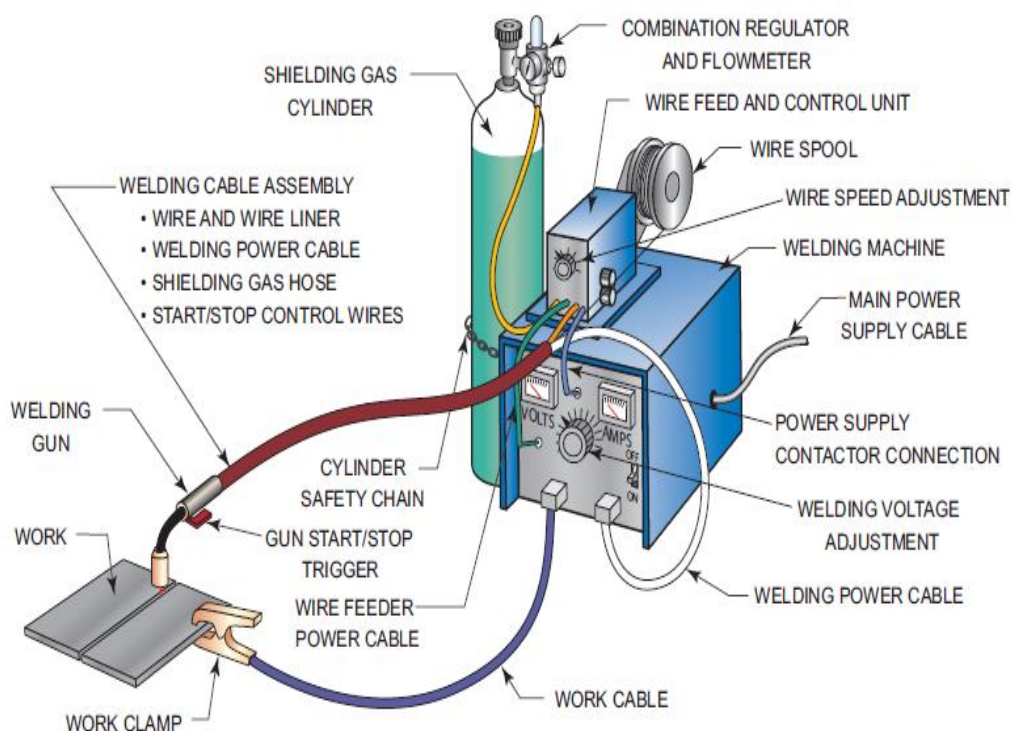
Welding Components of GMAW (Larry, 2012)
